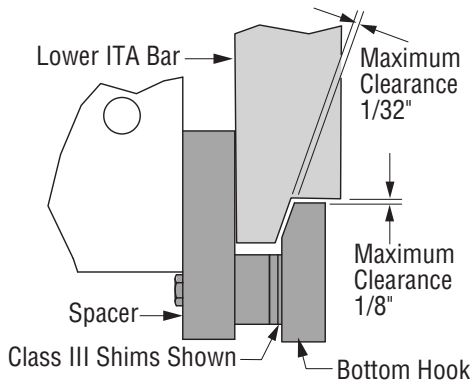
, Adjusting bolt-on bottom hooks with spacers
